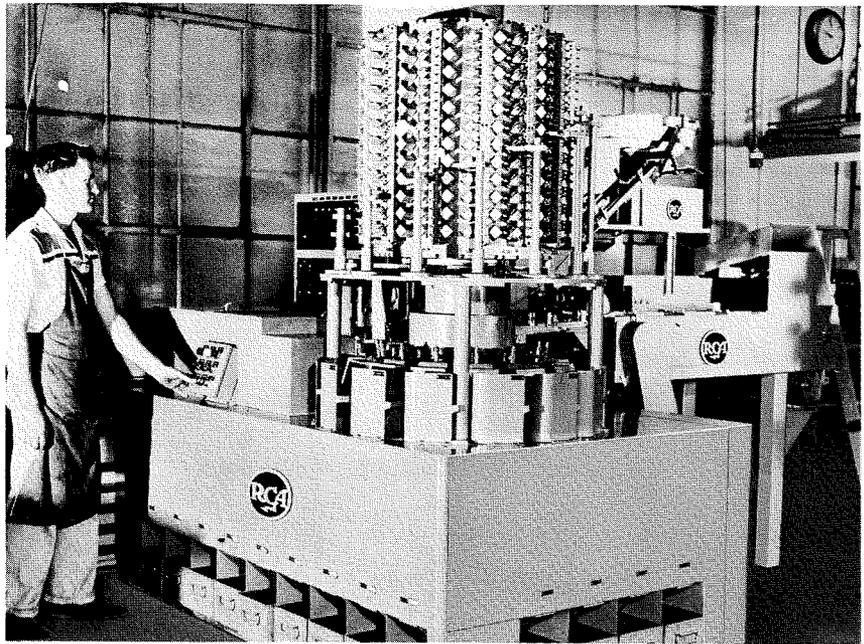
Roller Bearing inspection machine is operating at the Aetna Ball & Roller Bearing Company in Chicago. This equipment inspects and segregates roller bearings into 8 OK categories in increments of 0.0001 inch. They are also classified in 4 NG groups—OD over and under, and length over and under. Rate is 20,000 pieces per hour. The unit shown to the right rear is an RCA Non-Mar Feeder which supplies the rollers to the inspection machine as required.
